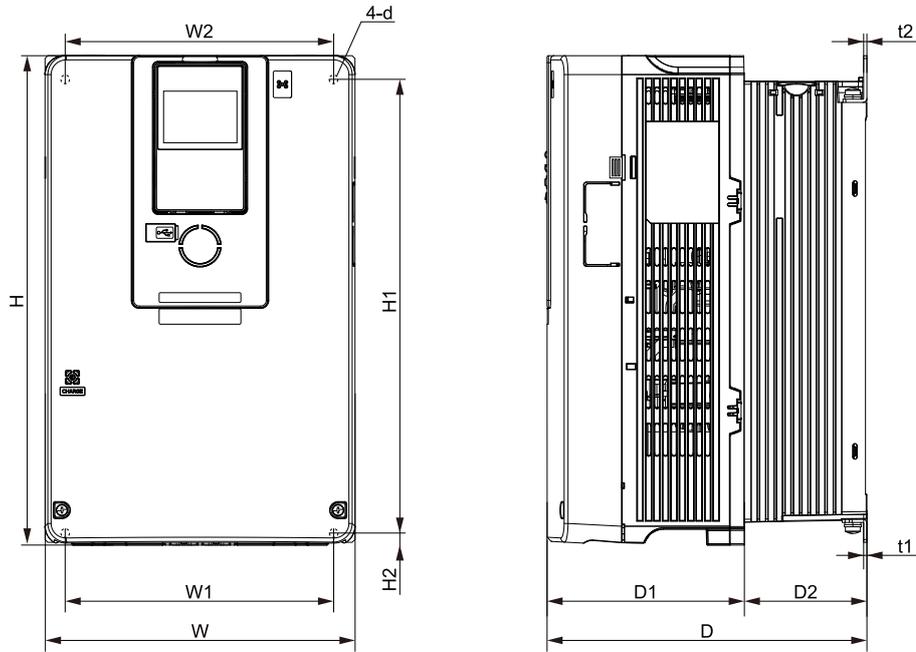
Exterior and Mounting Dimensions Diagram 3
